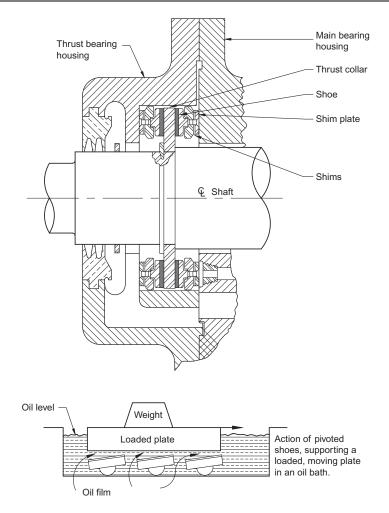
Button-type tilting-pad thrust bearing. Courtesy of the Elliott Company.
